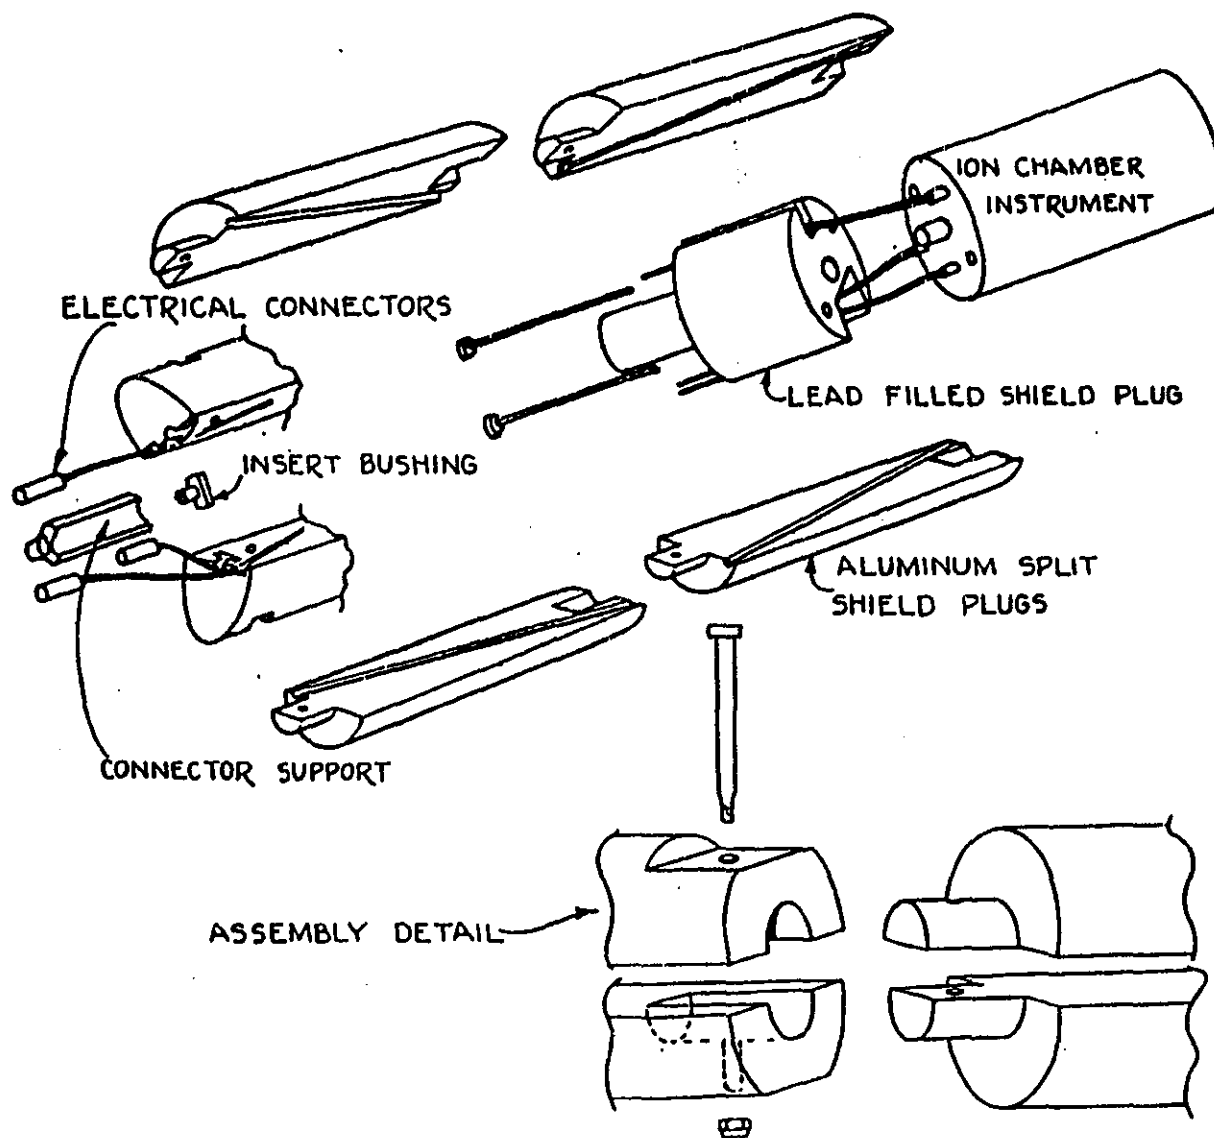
Exploded View of Ion Chamber Internal Parts
